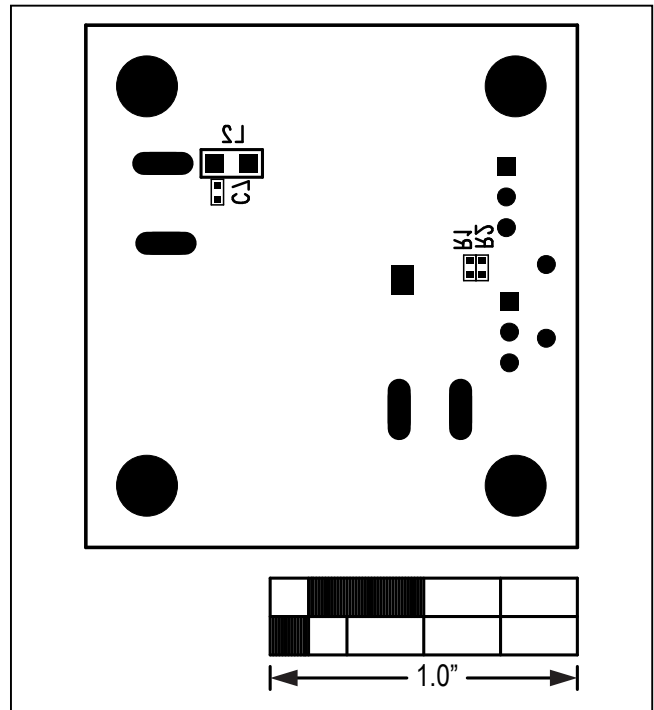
MAX16956 EV Kit Component Placement Guide—Solder Side
